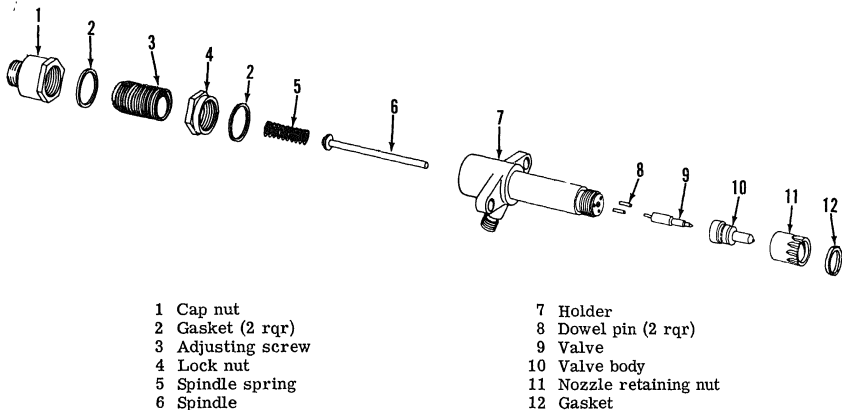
Fuel injection nozzle and holder, exploded view.
